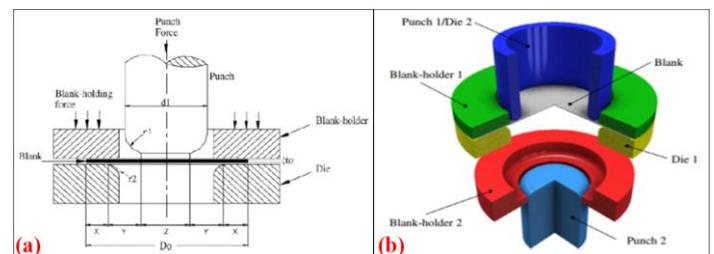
Deep drawing operation; (a) direct drawing, (b) reverse redrawing [4, 5]
